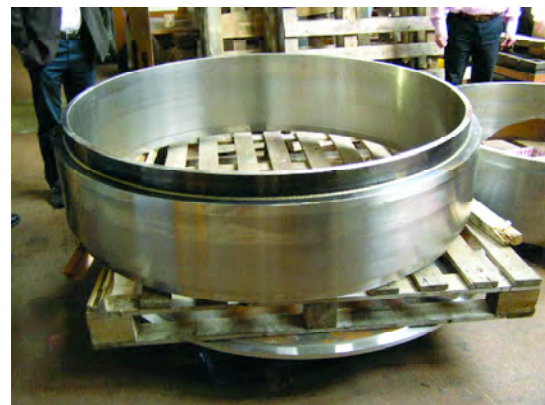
Half-meter long stainless steel inner waste package coupon with inner lid being readied for RPEB welding.
